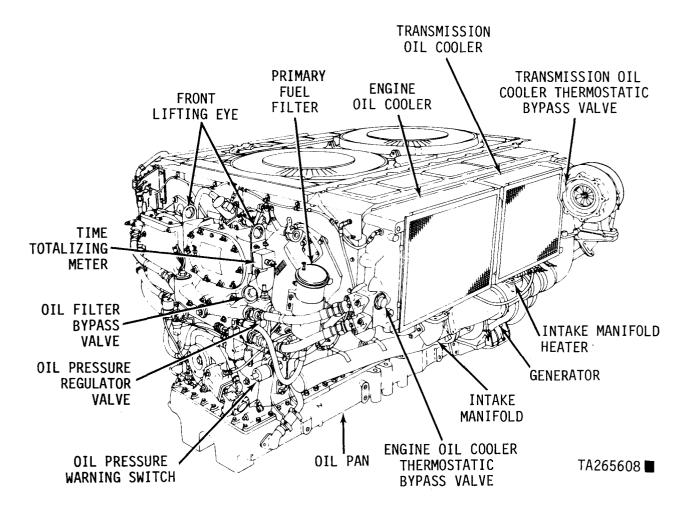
AVDS-1790-2DR engine assembly - right front view.
